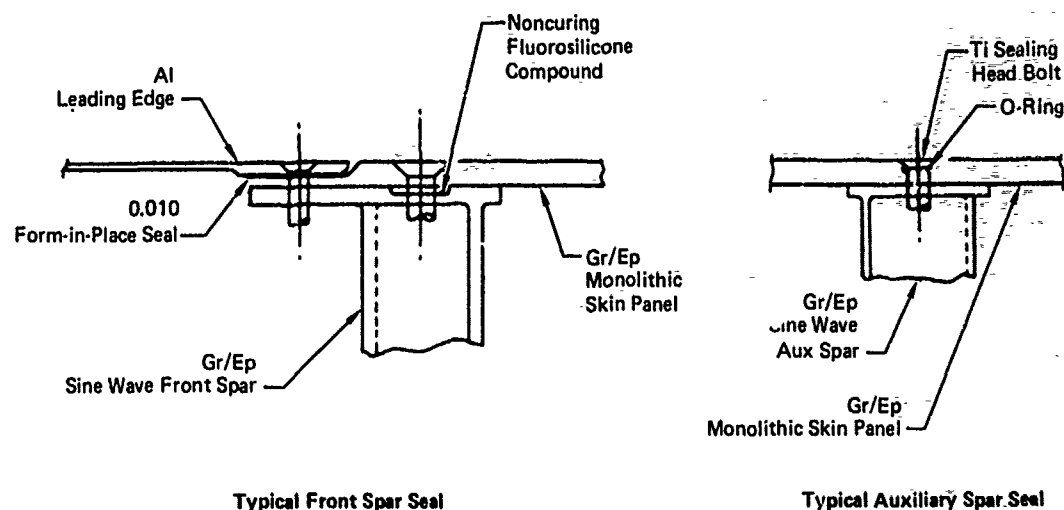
WING FUEL TANK SEALED SKIN SECTION
